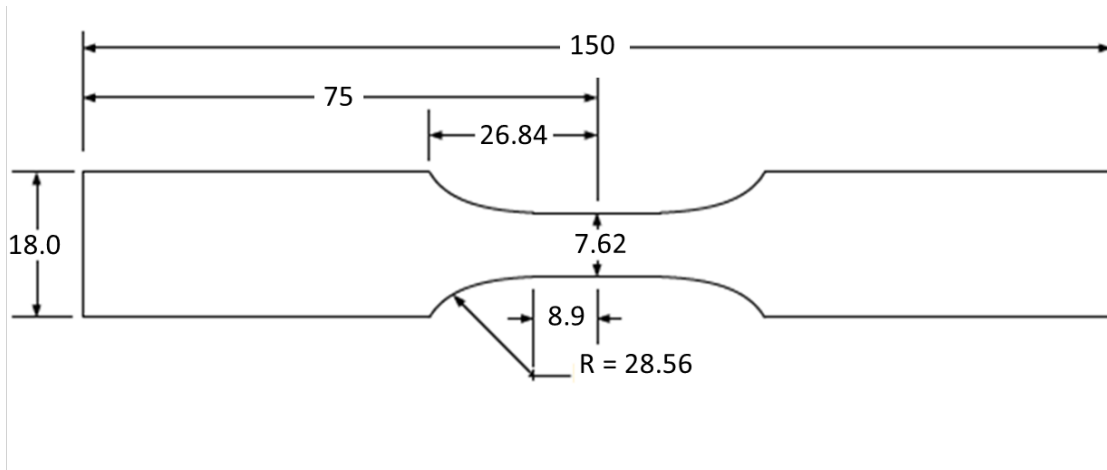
Dog bone shaped tensile specimen drawing, dimensions in mm.
